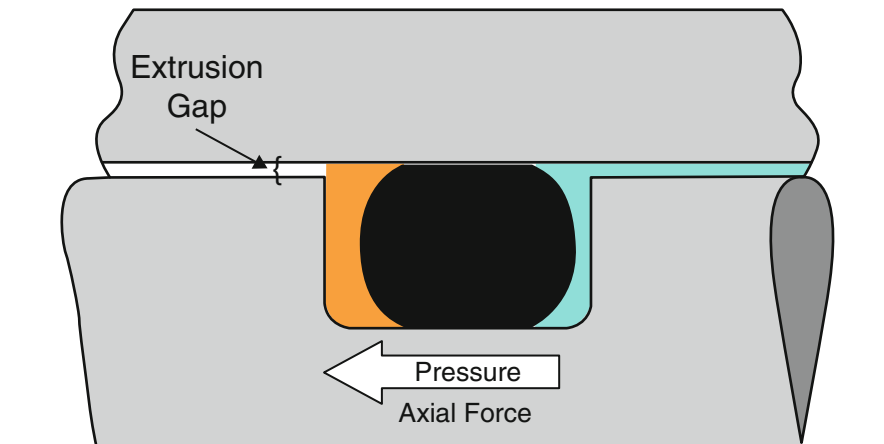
O-ring test fixture used to evaluate concave backup ring [10]
